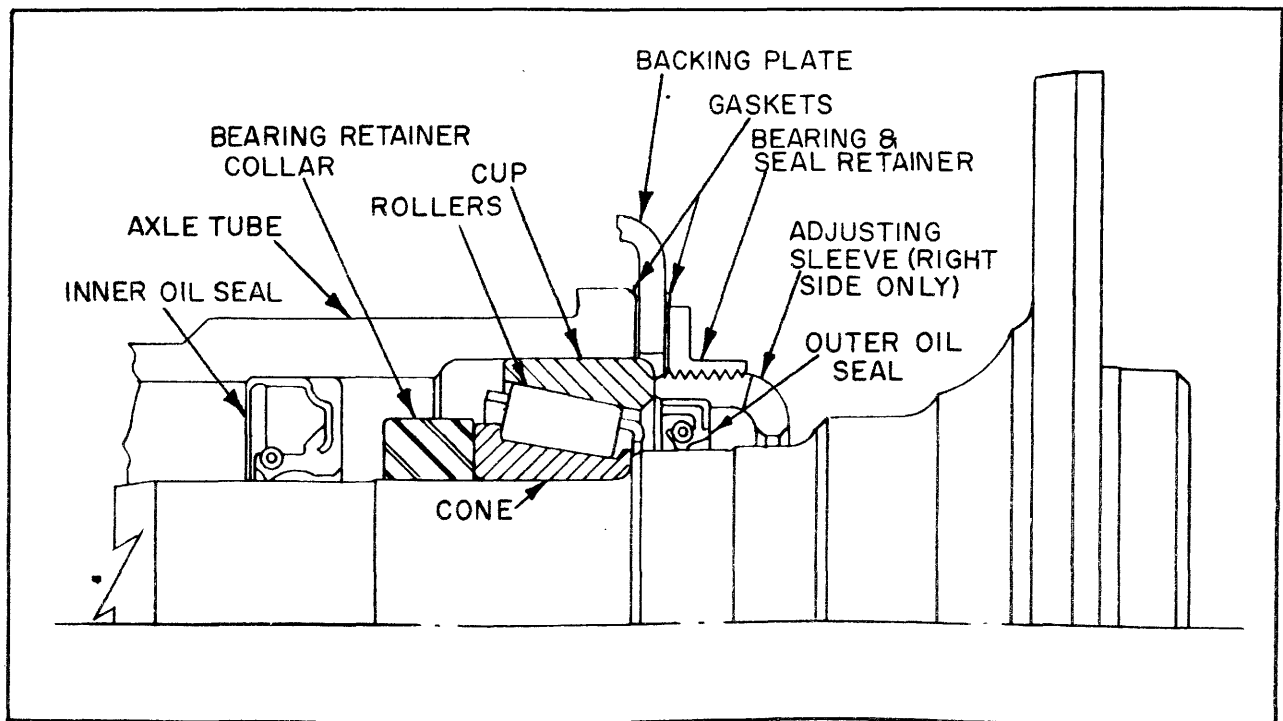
Aerobus Rear Axle and Bearing Assembly
